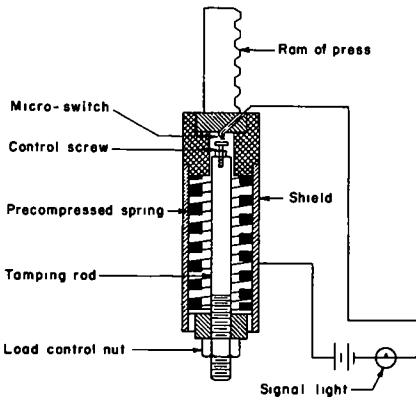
Spring assembly for University of California hand-operated kneading compactor (91).
